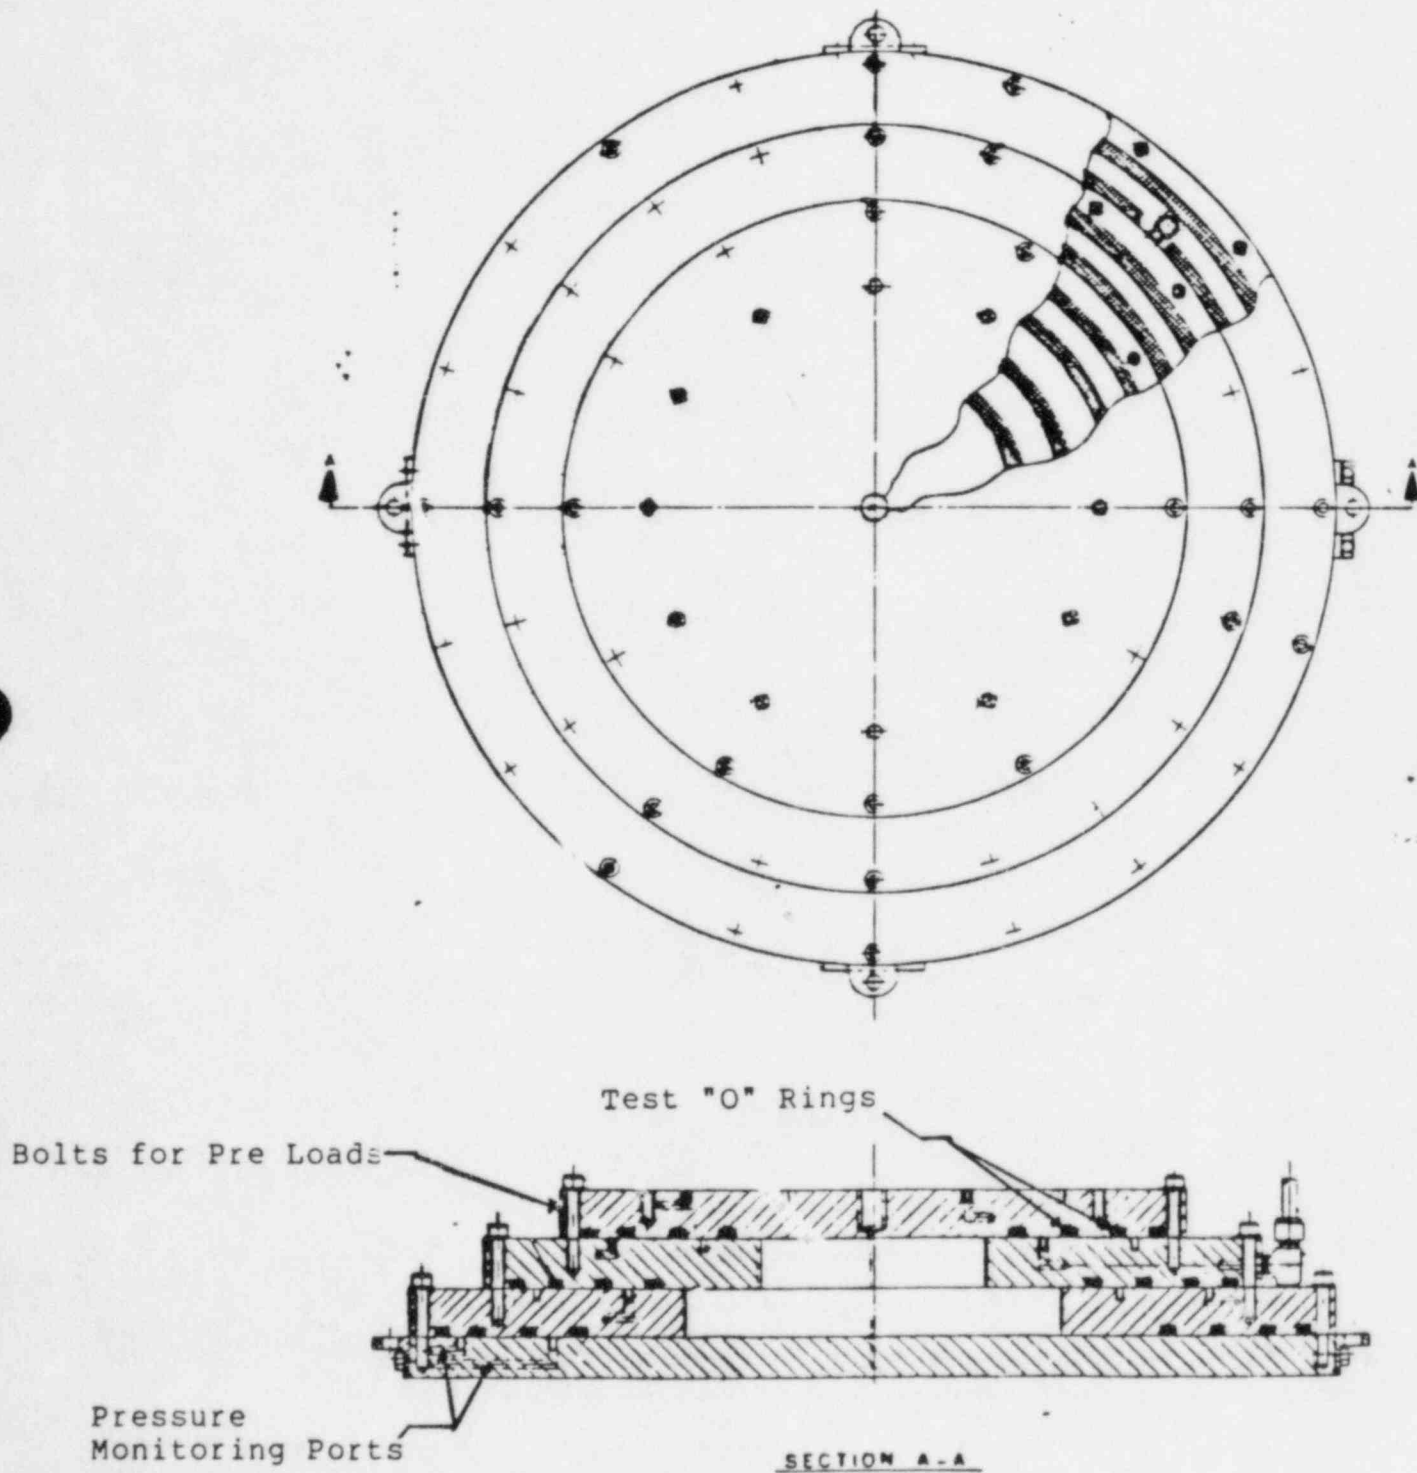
FLANGE ASSEMBLY FOR DOUBLE "O" RINGS TEST
